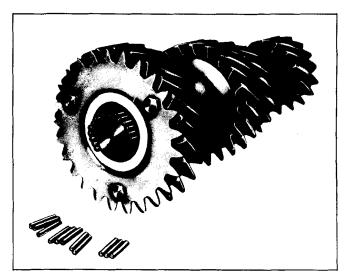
D-31 Loading Bearing Rollers into Countershaft Gear
